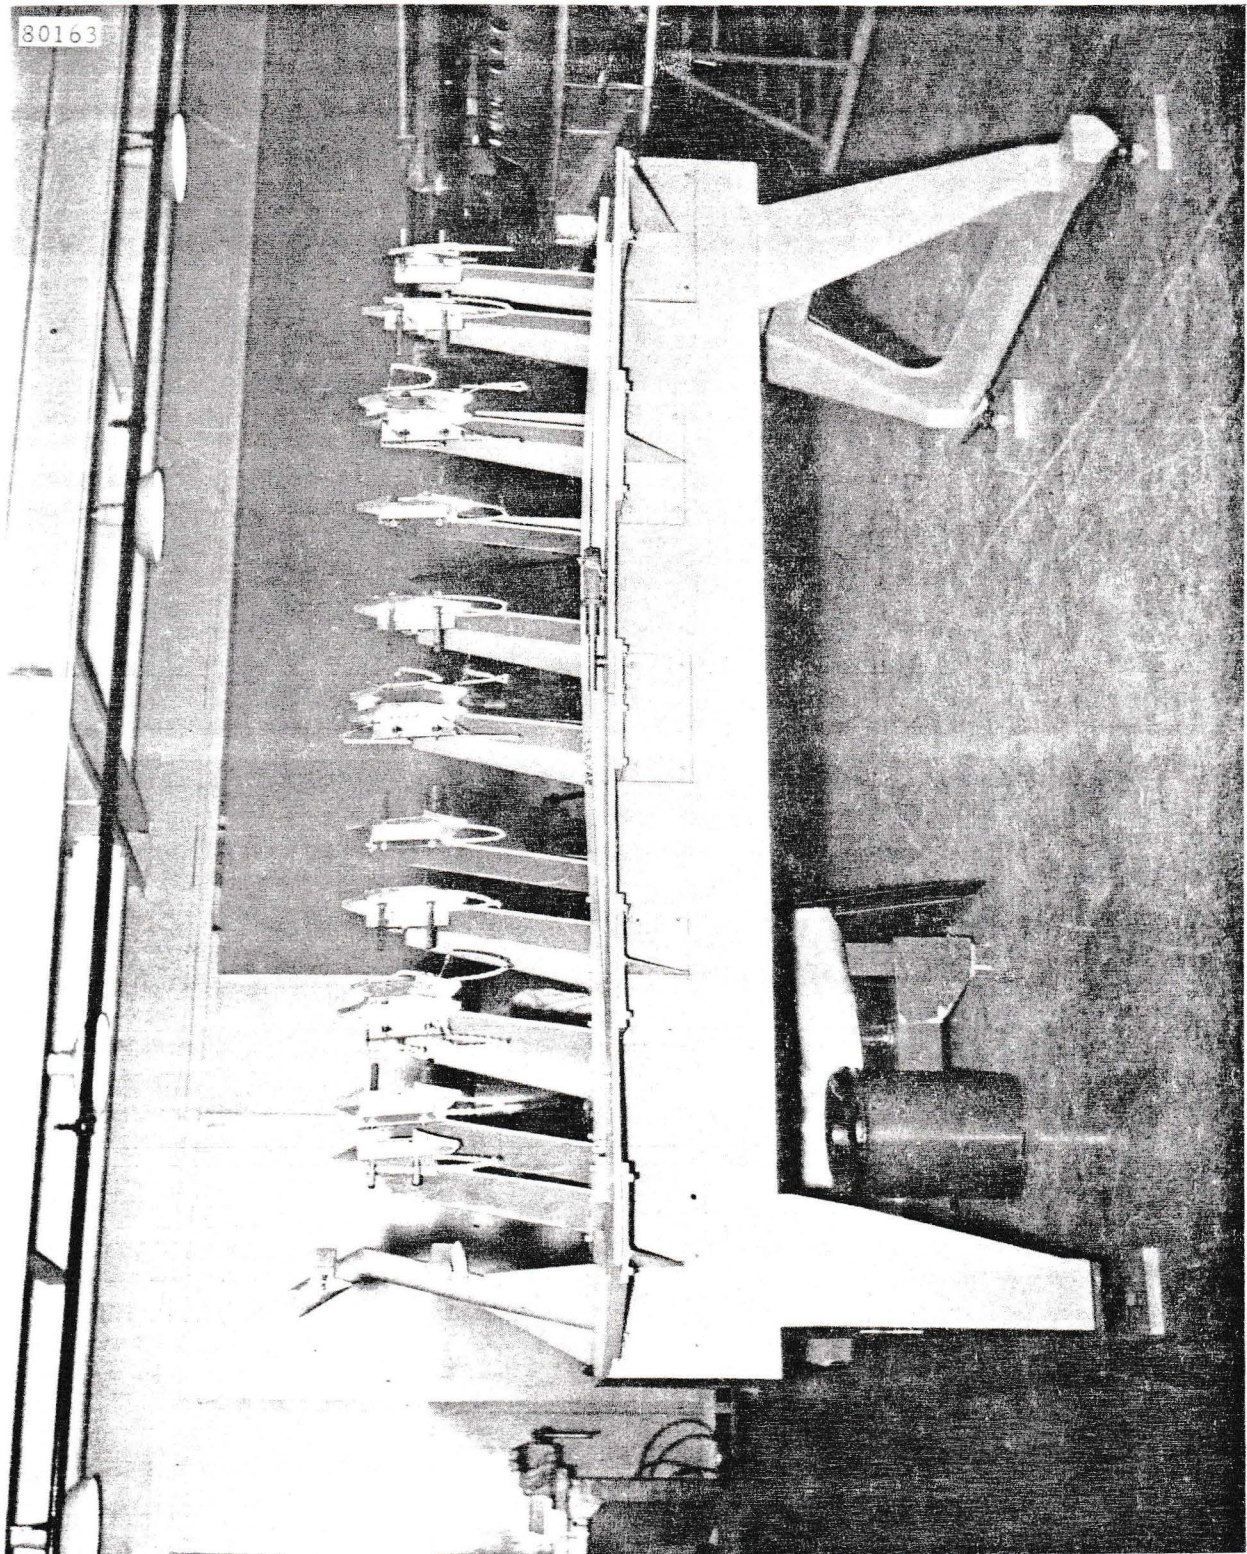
SUB-ASSEMBLY JIG FOR INNER SEGMENT OF THE WING TIP
